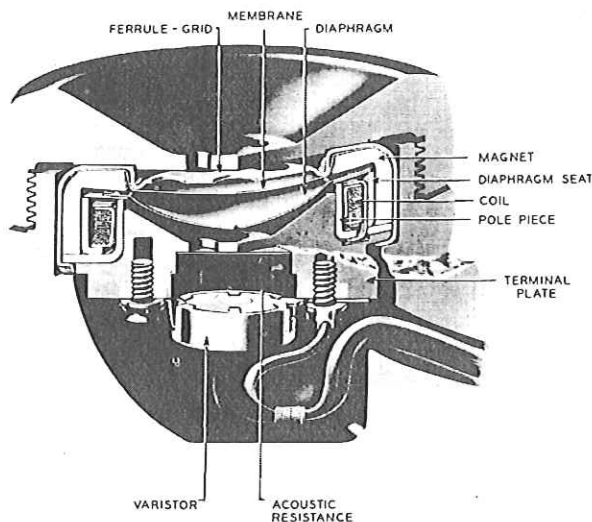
U1 Receiver—Sectional View in G1 Handset
